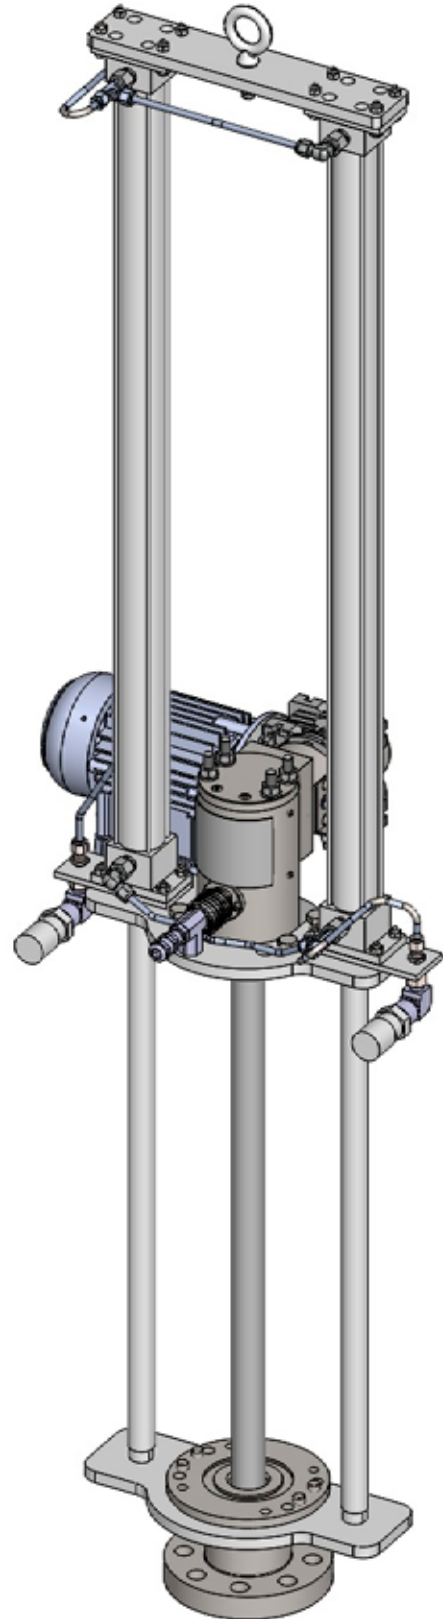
Isometric view of ET-100 Insertion Tool mounted to API-PE Sampler
